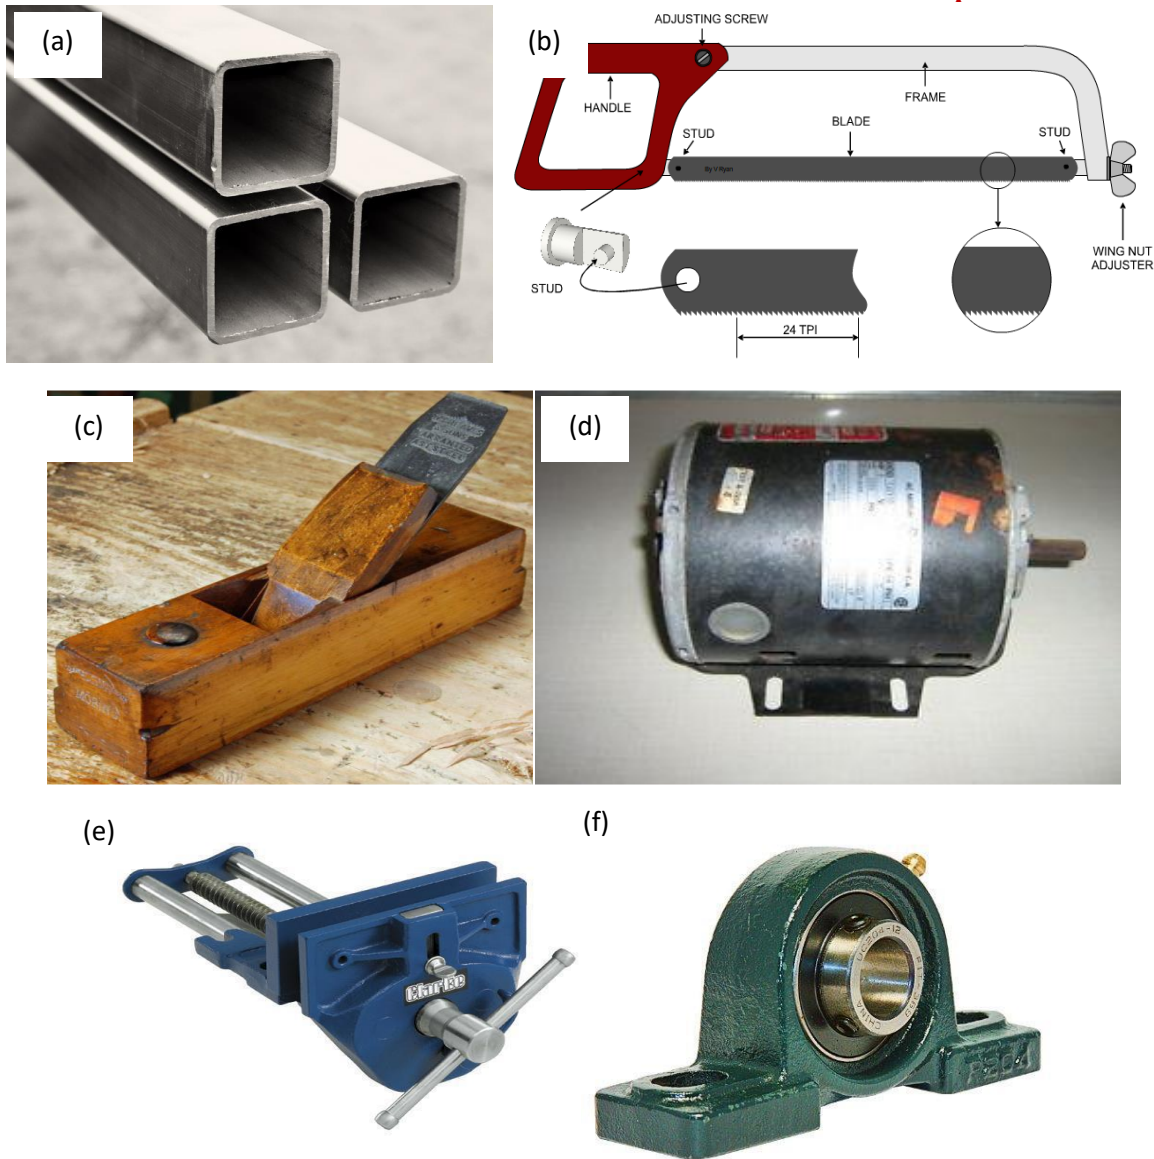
(a-f) (a). mild steel frame (b) hack saw blade (c) wood block panel (d) motor (e) vice (f) bearing
